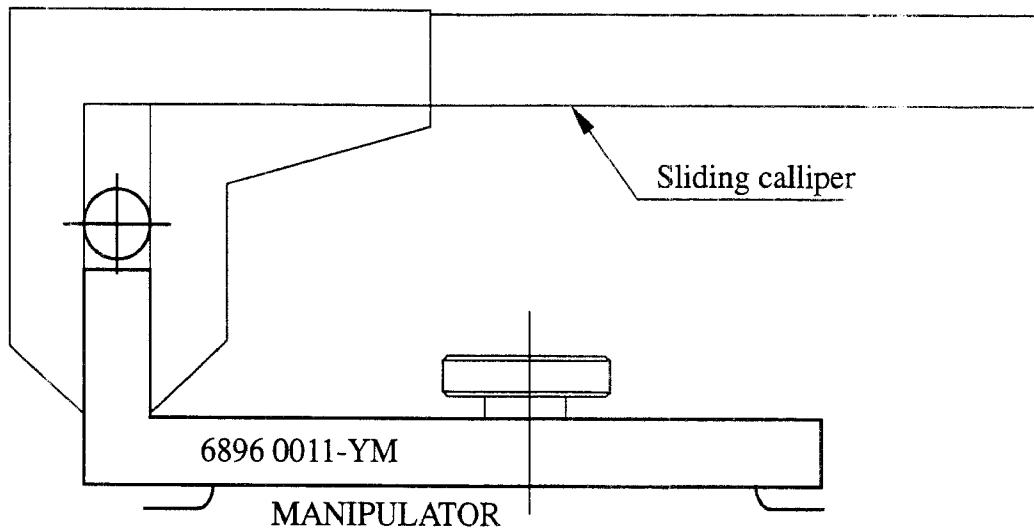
Aligning the pin and tool with a sliding calliper for axis 1.
